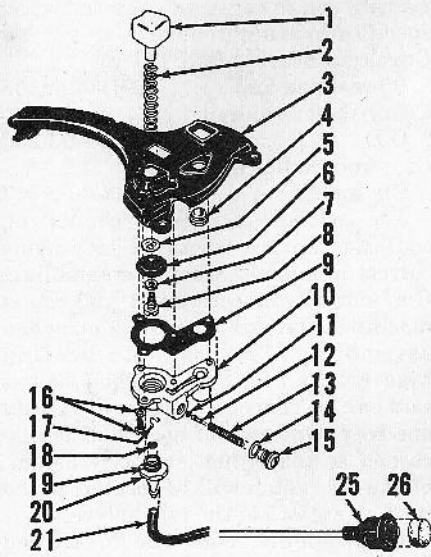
Exploded view of fuel primer pump and associated parts used on most models.
